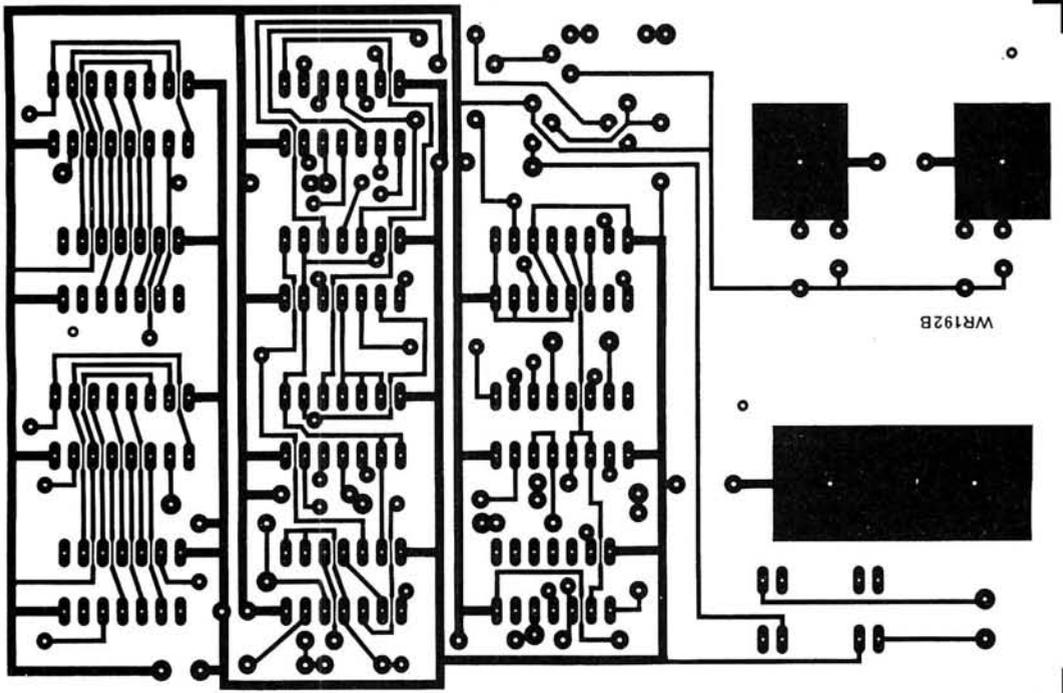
Full size p.c.b. track pattern (lower non-component side) and component placement diagram of the double-sided control board. Ensure all through-board links are soldered to the pads provided, taking particular care with those located underneath i.c. sockets which are virtually impossible to check once the sockets are installed
